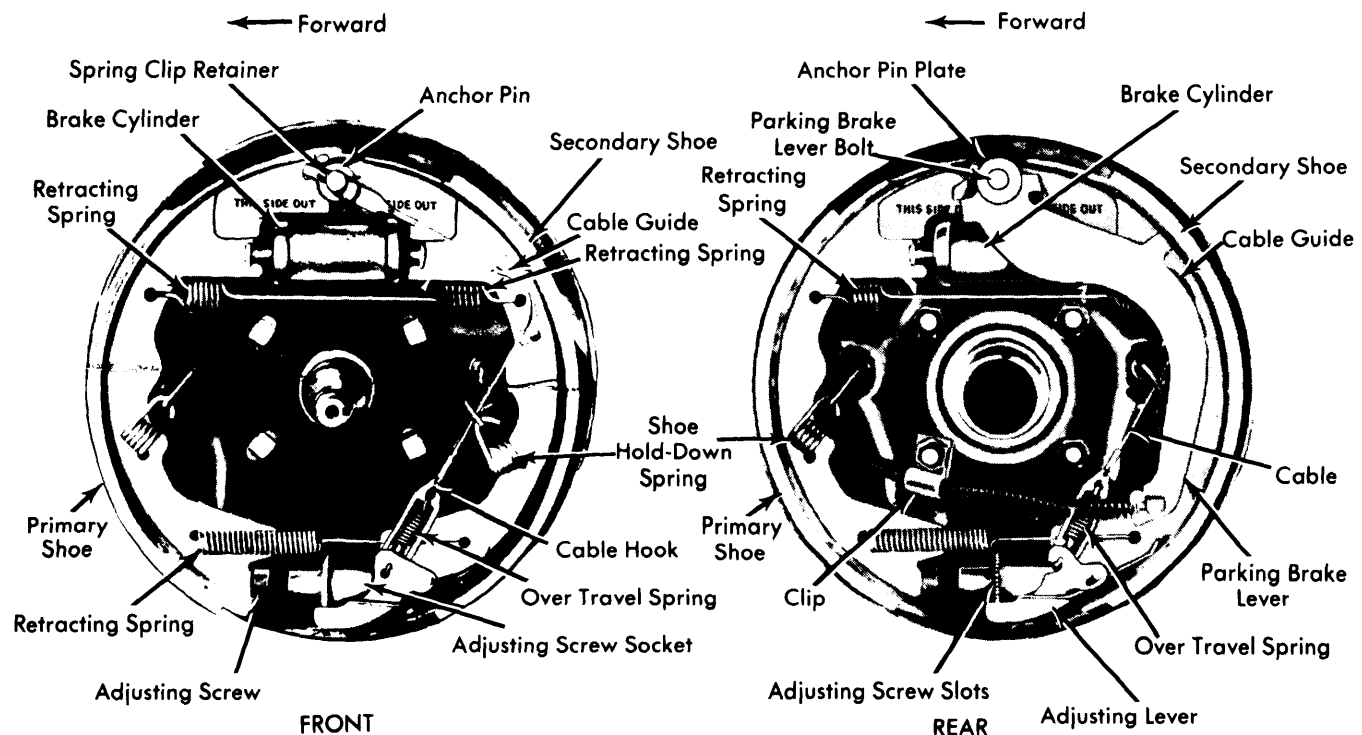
Sectional View of Automatic Adjuster Brake Assembly (Heavy Duty Vehicles)
